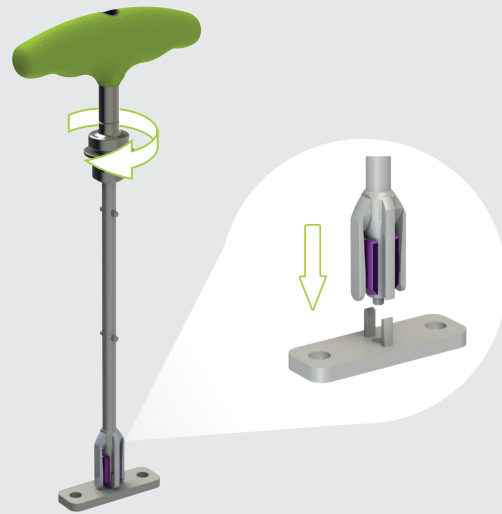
Disengaging the tabs by rotating the WINX Removal Tool by 90° in any direction.
